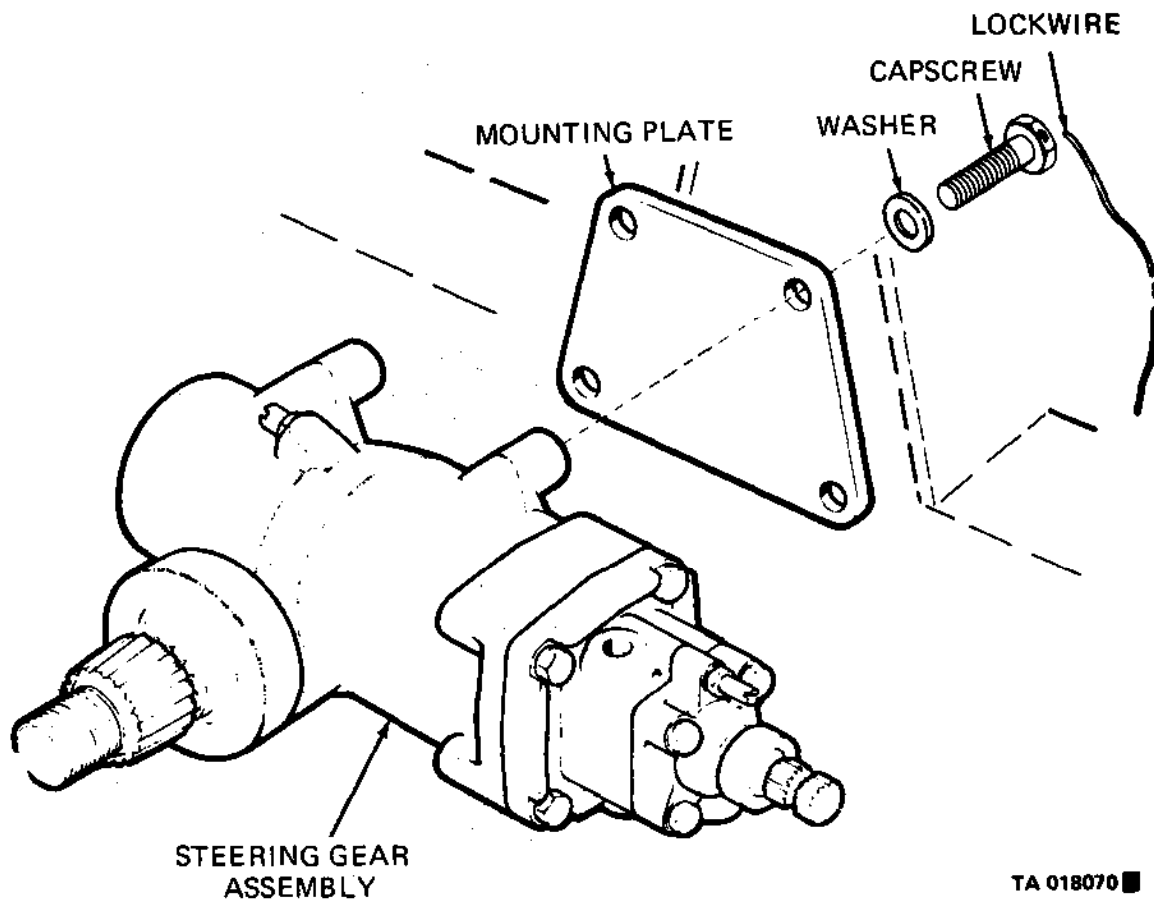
Steering gear assembly and attaching parts - exploded view.
